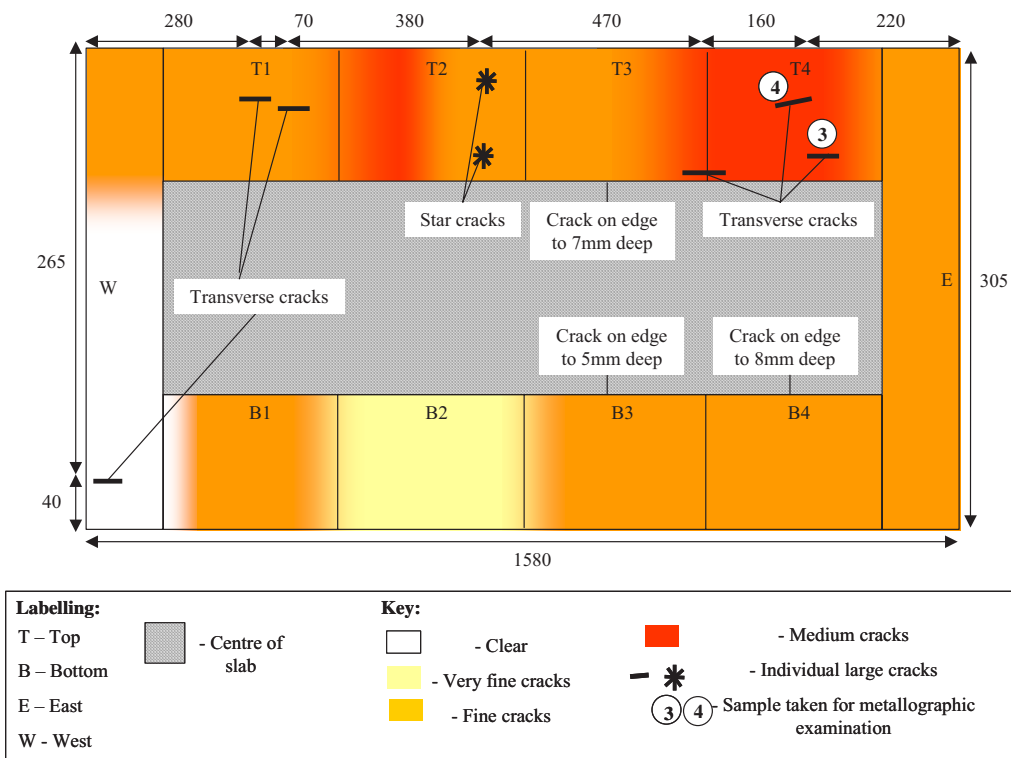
Photograph of cracks found on broad face of cast 60933, slab 5E
